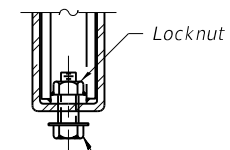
/4" Ø ROUND HEAD BOLT
